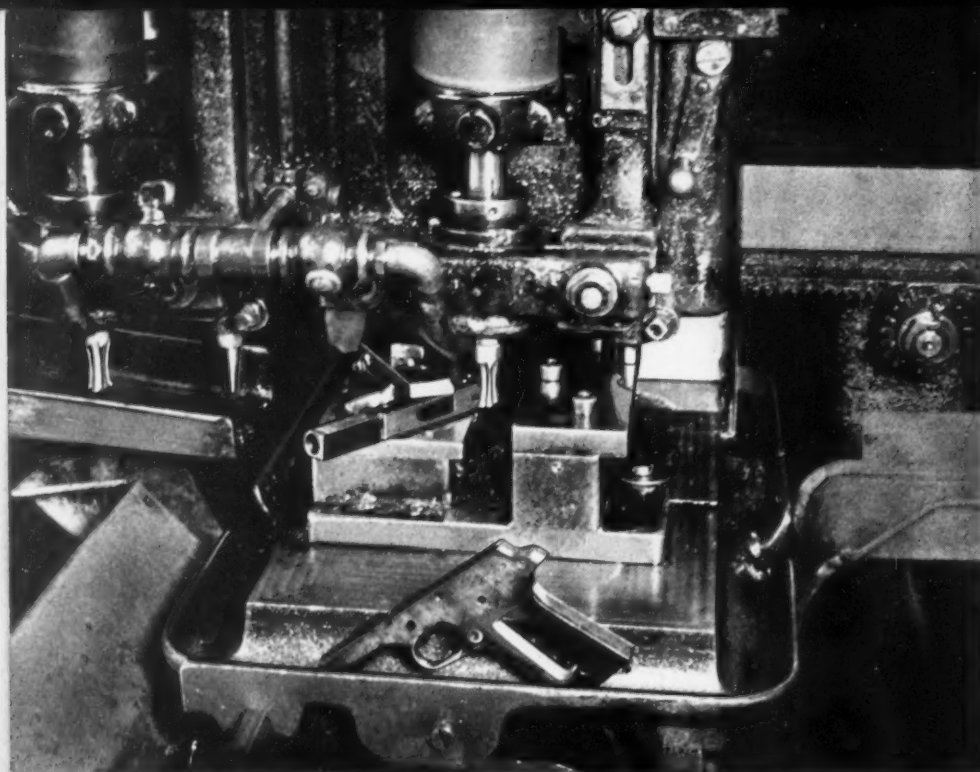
Profile Milling the Contour around the Hammer Guard of the Receiver. A Receiver with Finished Hammer-guard Profile is Shown at the Front of the Machine
